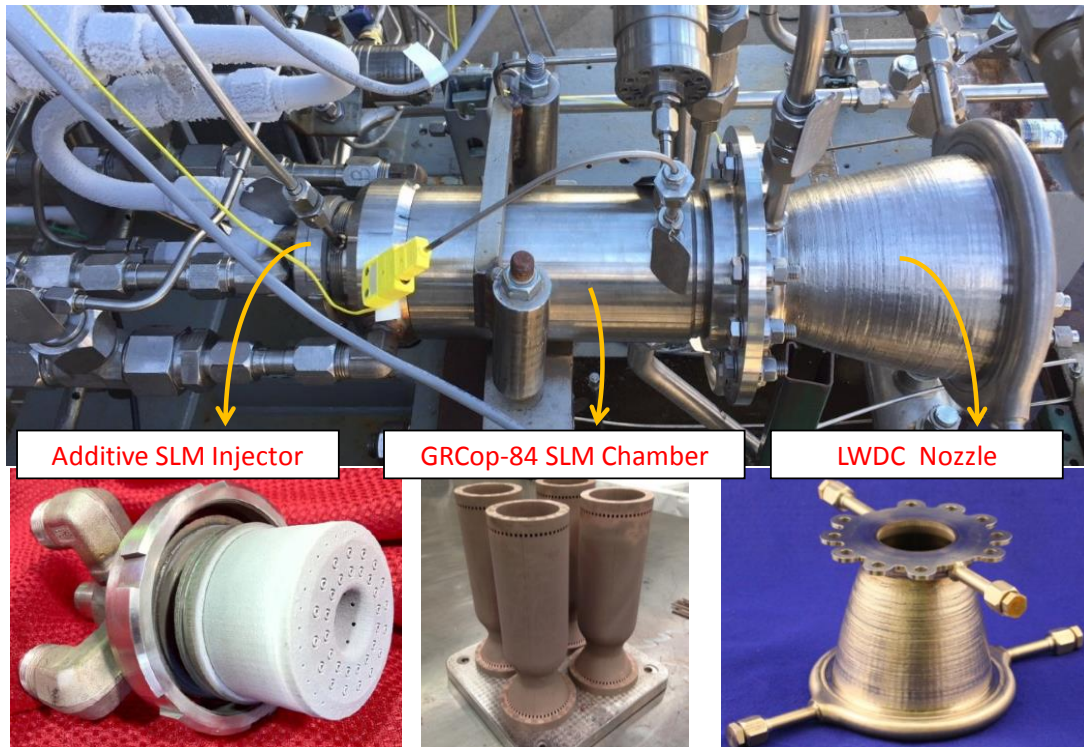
Thrust Chamber Assembly with LWDC Nozzle #1 Installed at MSFC Test Stand 115.
